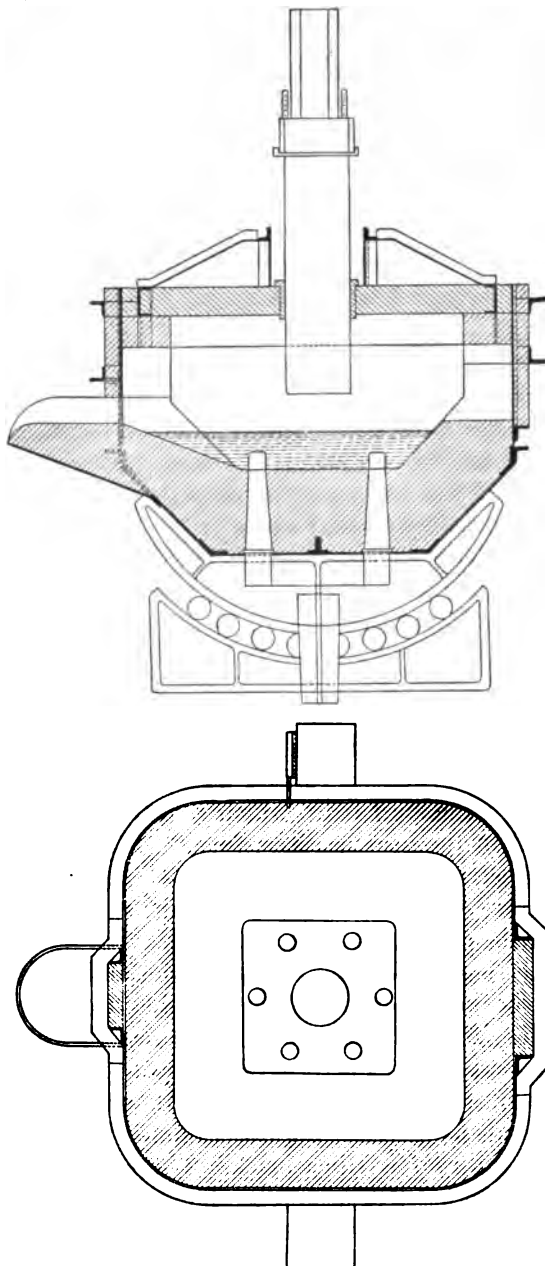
Plan and elevation of 2.5 to 3 ton, single-phase Girod steel furnace, Ugine, France.
